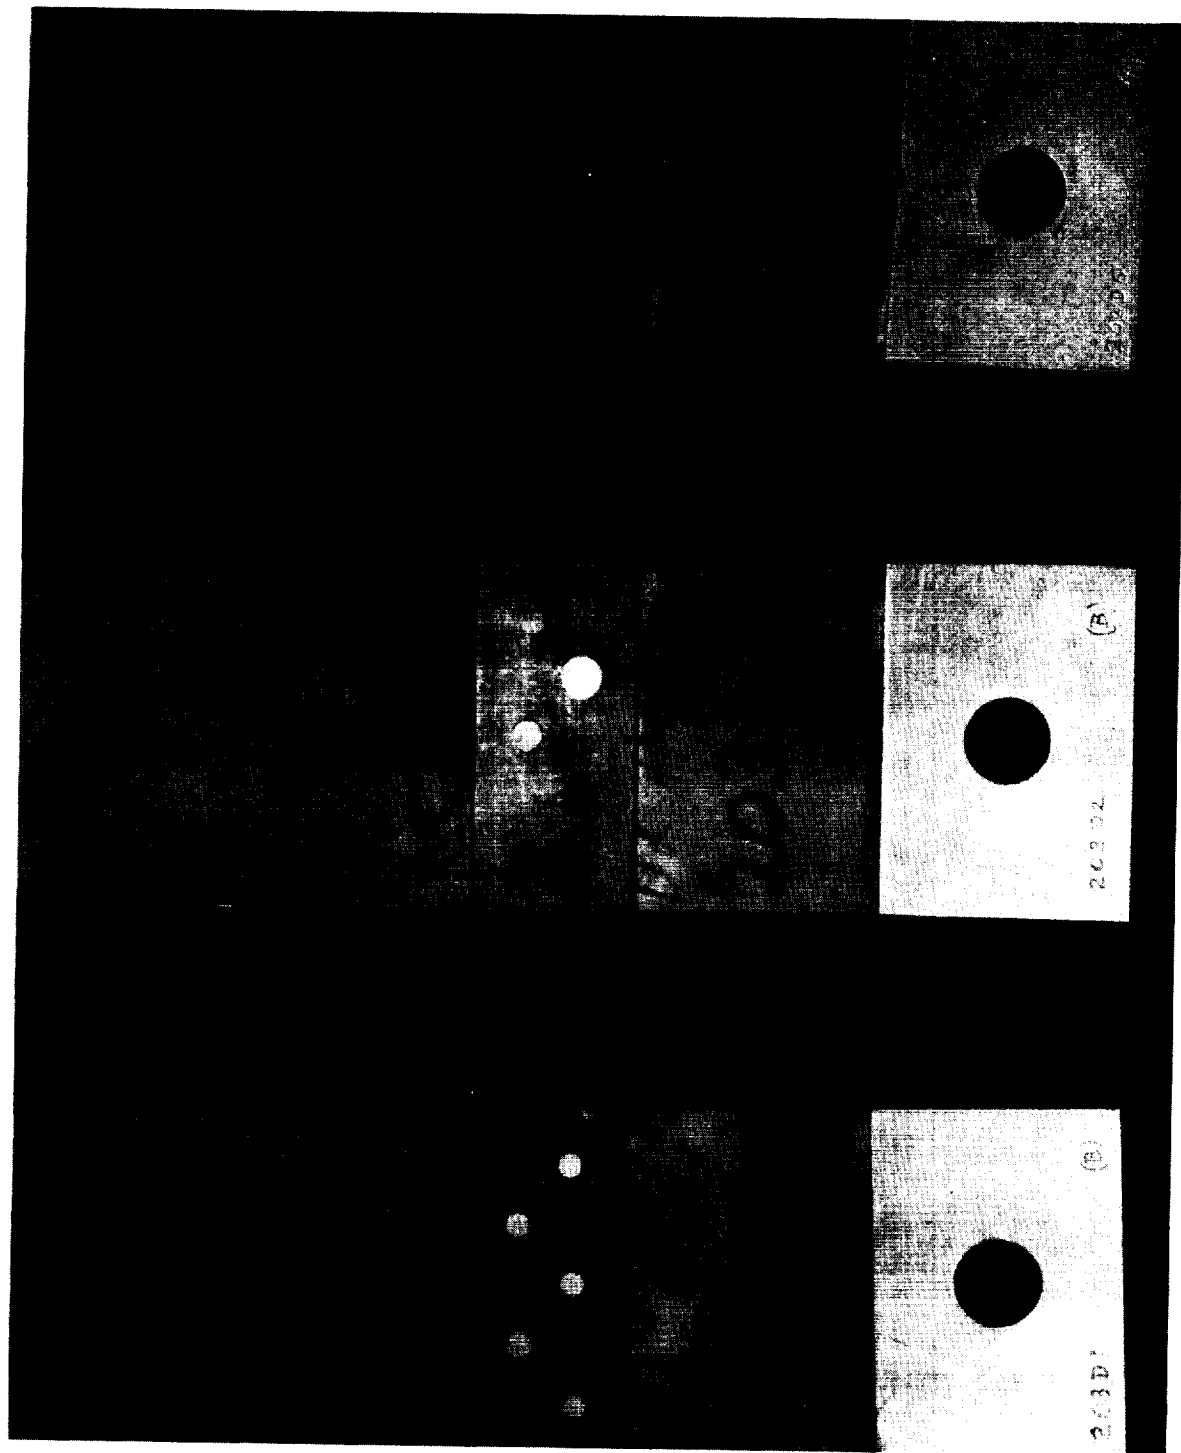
TYPE IIID SPECIMENS - COUNTERSUNK BERYLLIUM RIVETS.
